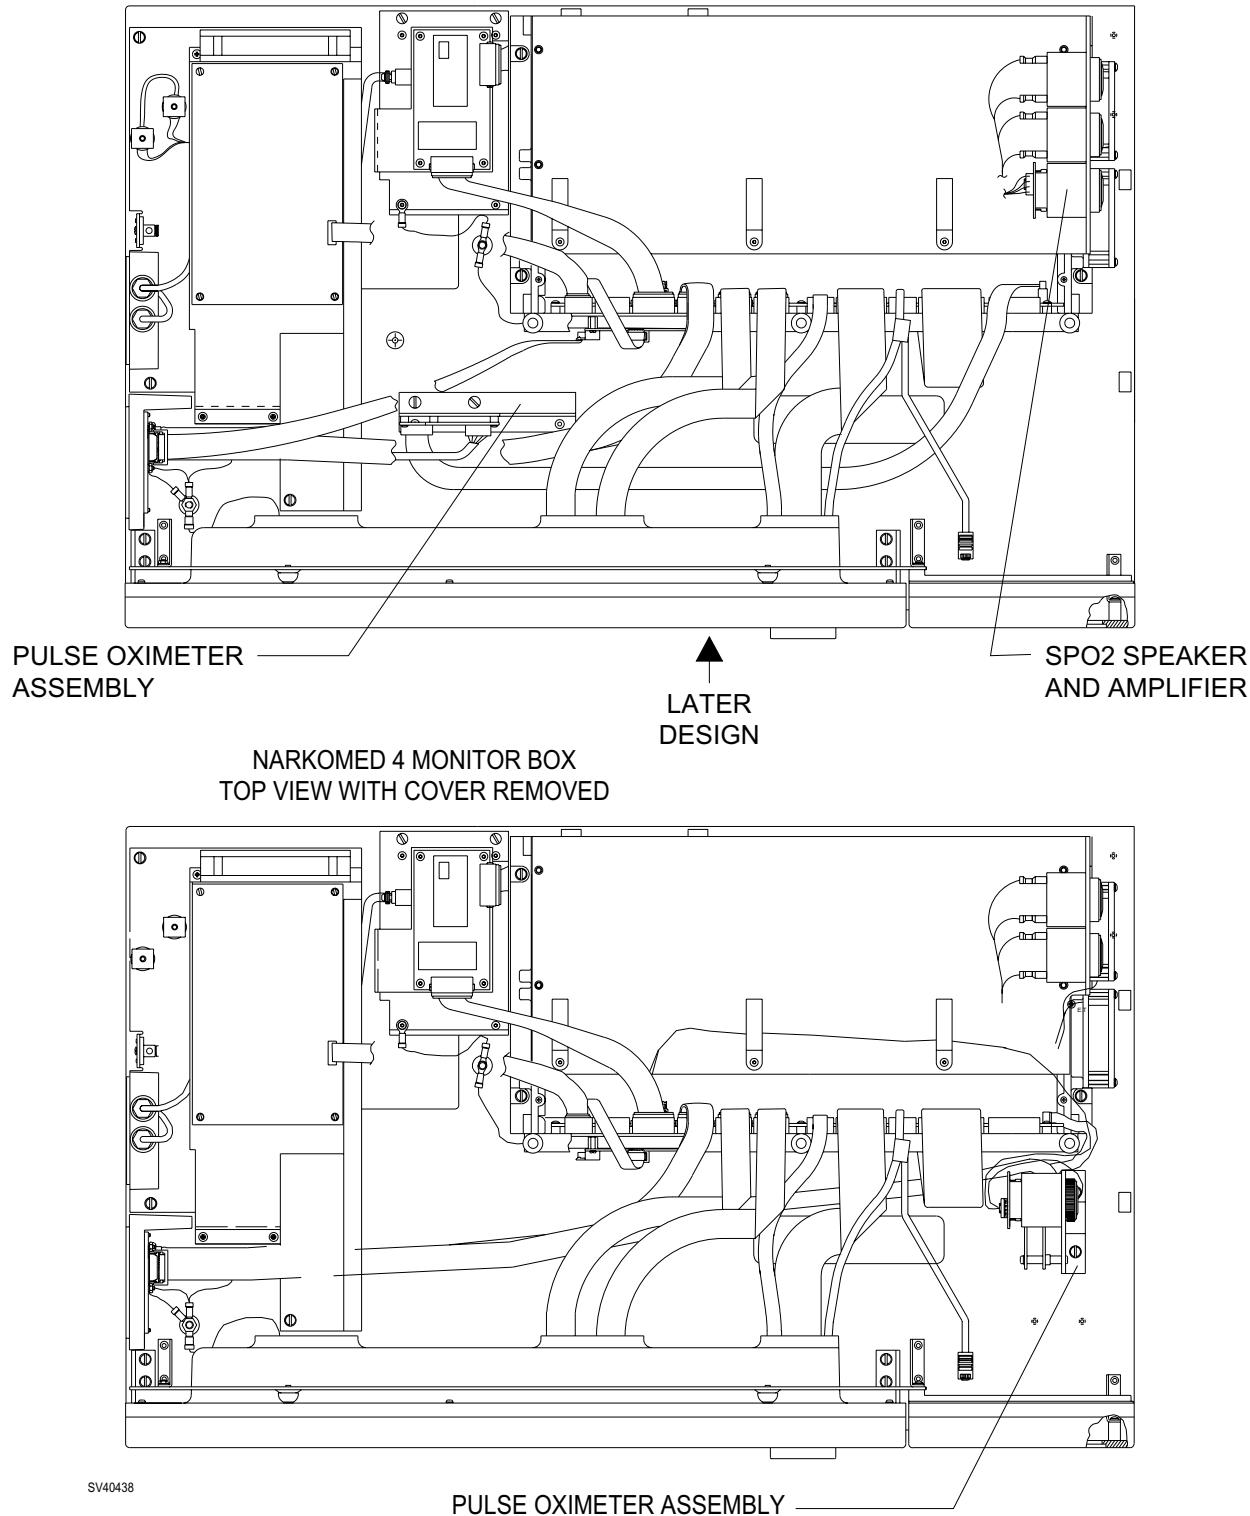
PULSE OXIMETER ASSEMBLY LOCATION
